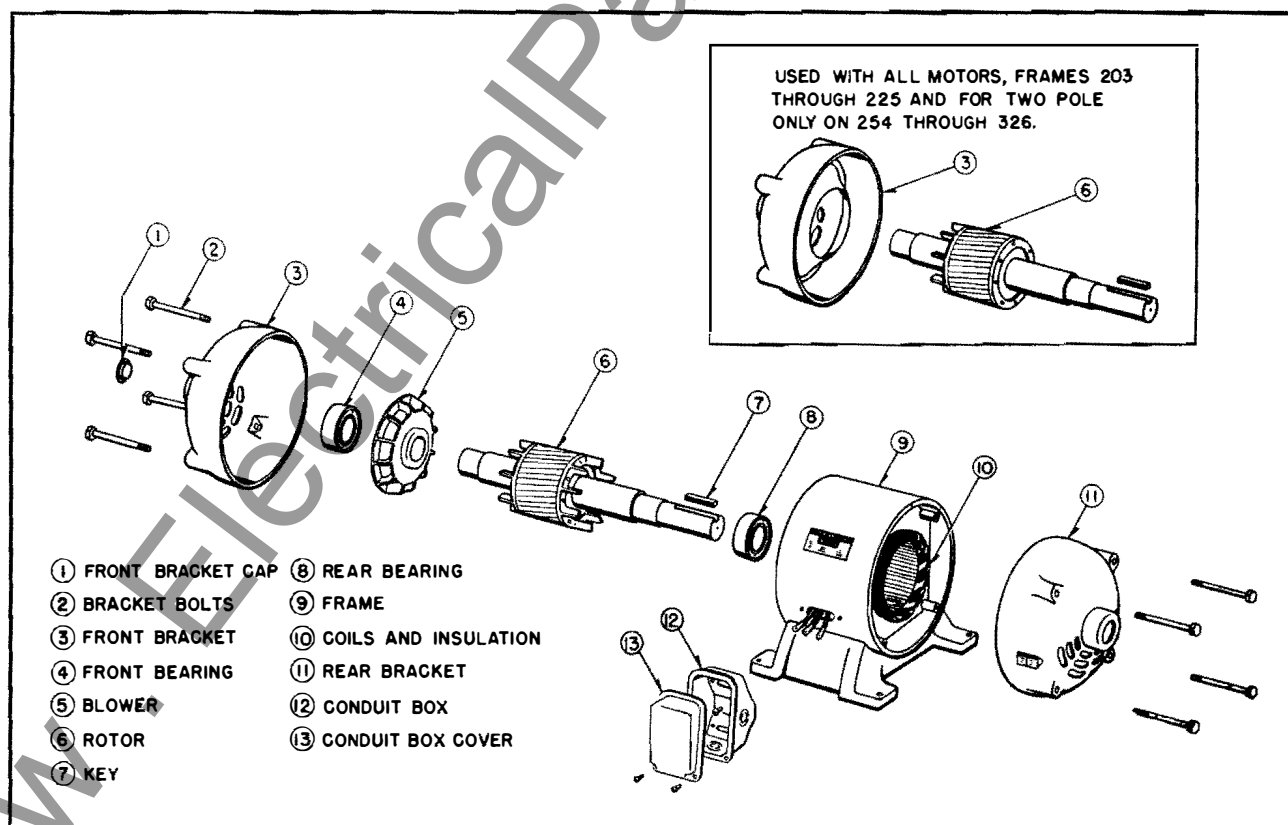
Arrangement of Parts—\*Drip-Proof Type CSP Motor (Frames 203-326)
